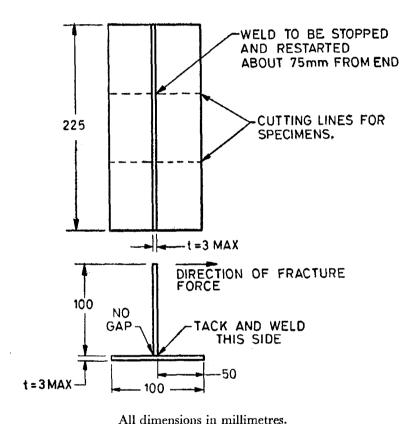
Test Piece for Fillet Weld in Sheet
